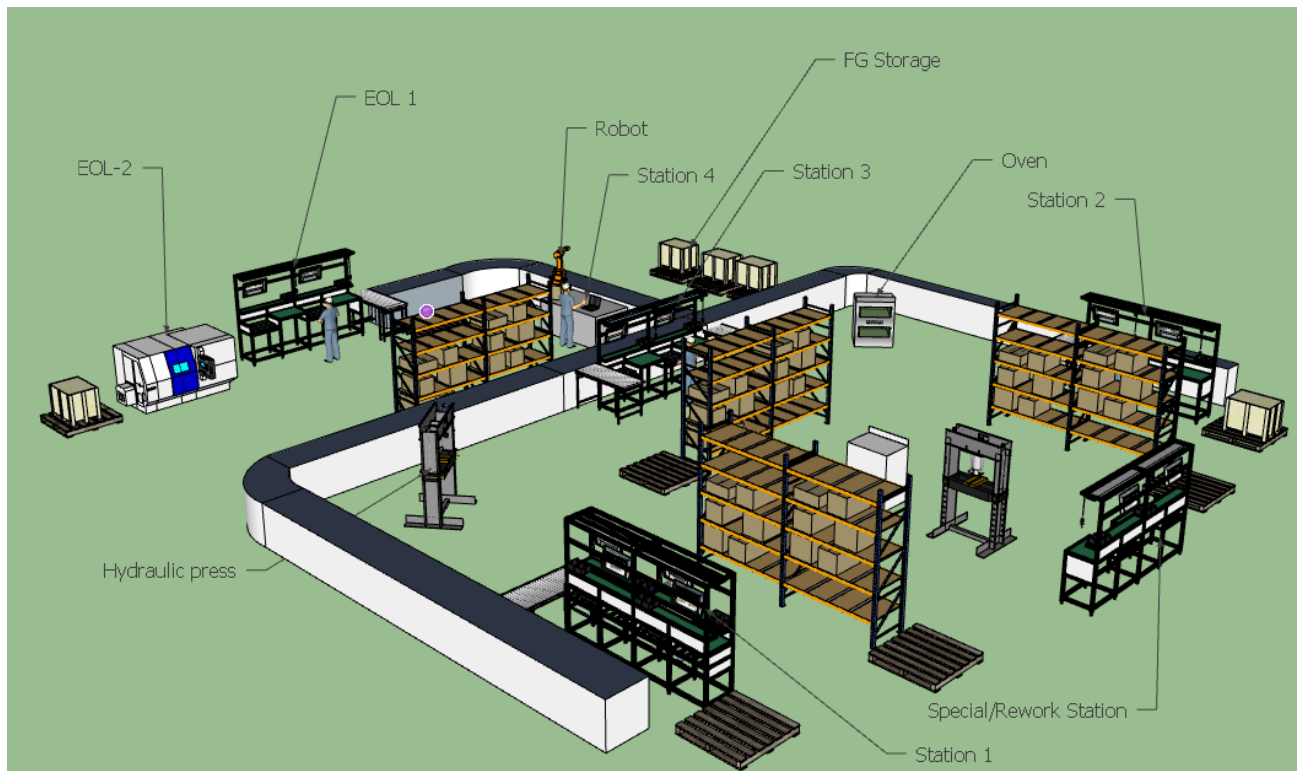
Optimized U-shape assembly line. Source: Own illustration.
